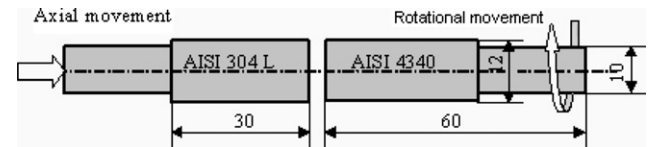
The welding assembly of friction-welded AISI 304L/AISI 4340 components.
